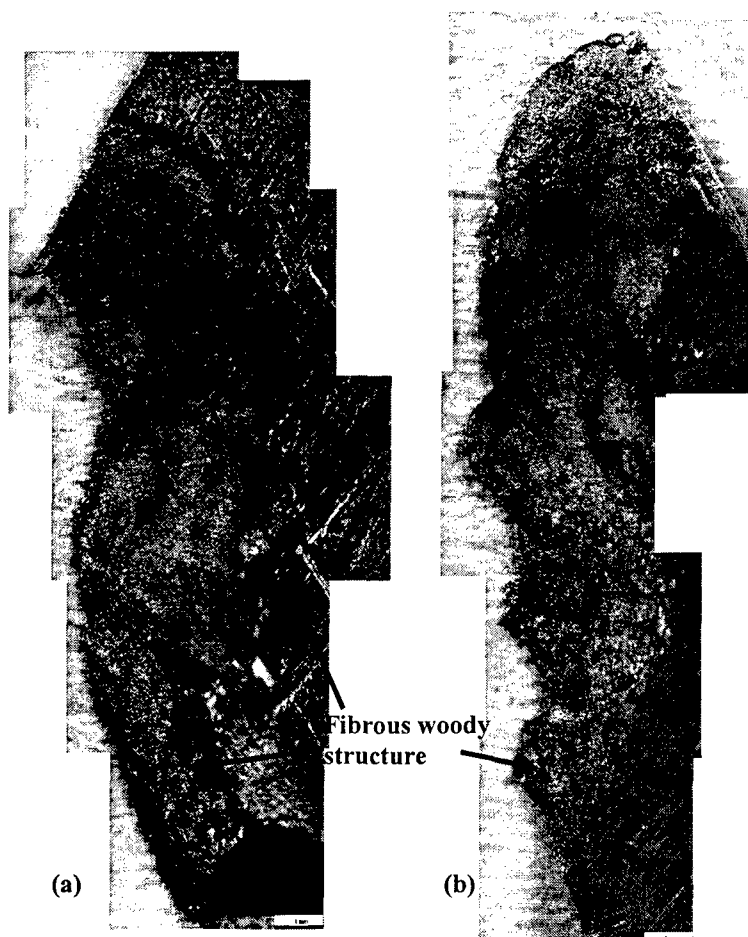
High magnification image of a) right half of fracture surface as shown in Figure 3 and b) the opposite of the same fracture surface.
